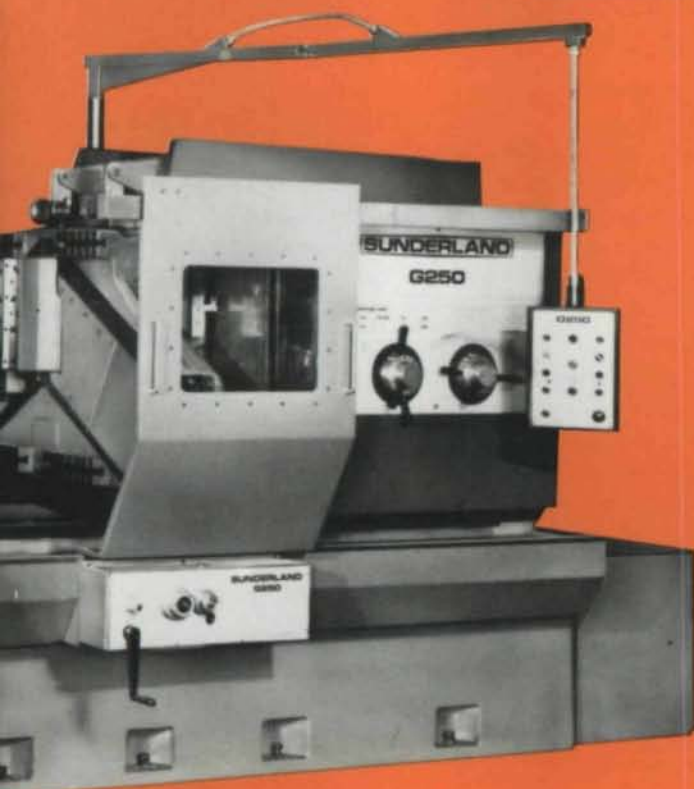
(Right) Illustrates a G250 cutting a large spur gear of 76" diameter 9" face width and 1 DP pitch, for a crane in a steelworks.
